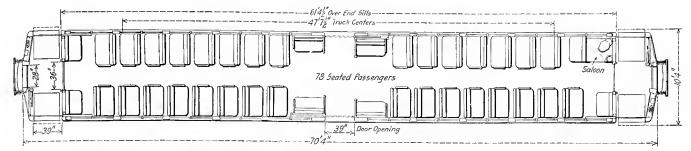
Floor Plan of New York, Westchester & Boston Suburban Car Shown in Fig. 189.
